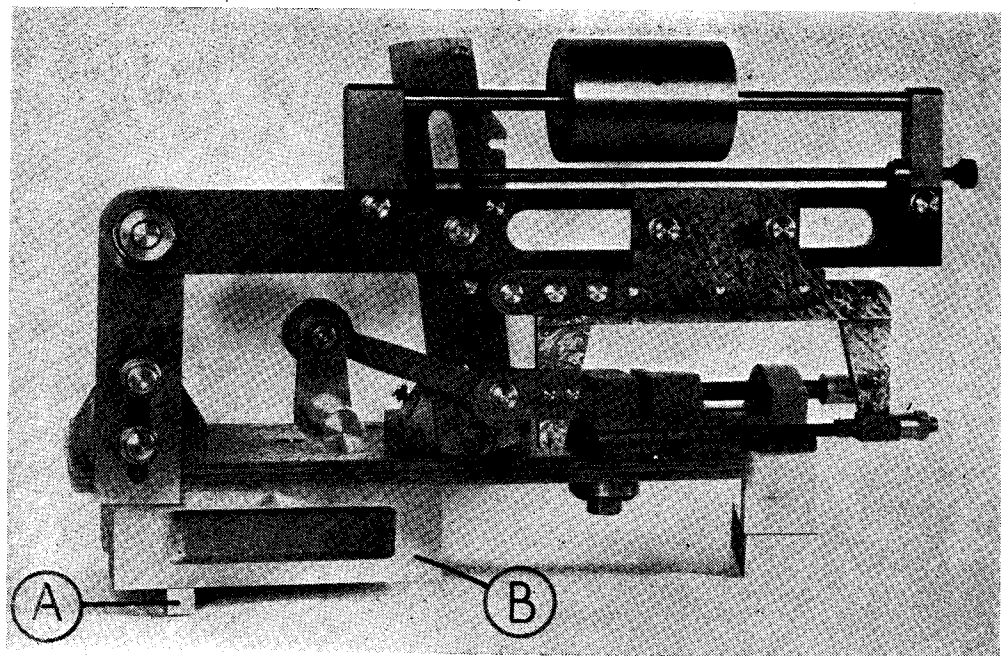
Front view of the machine : "A" is the guide strip and "B" one of the two raising blocks
